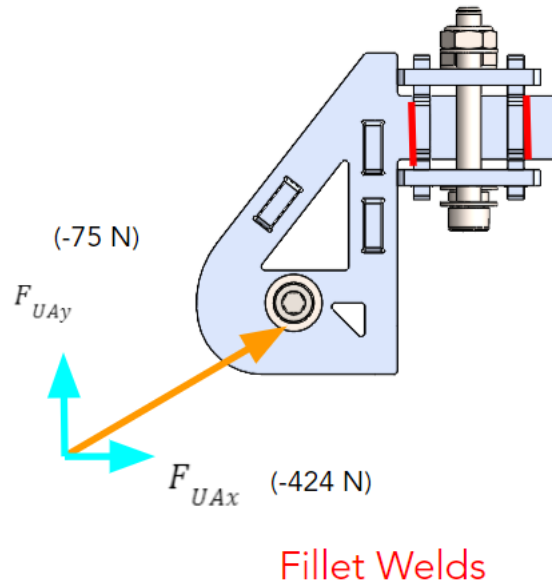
Upper Control Arm and Shock Suspension Welds Free Body Diagram
